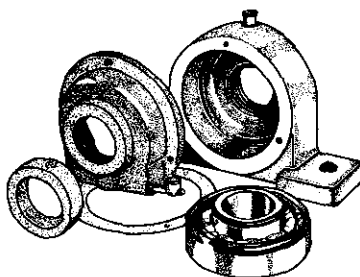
Disassembled View of Pillow Block Ball Bearing
